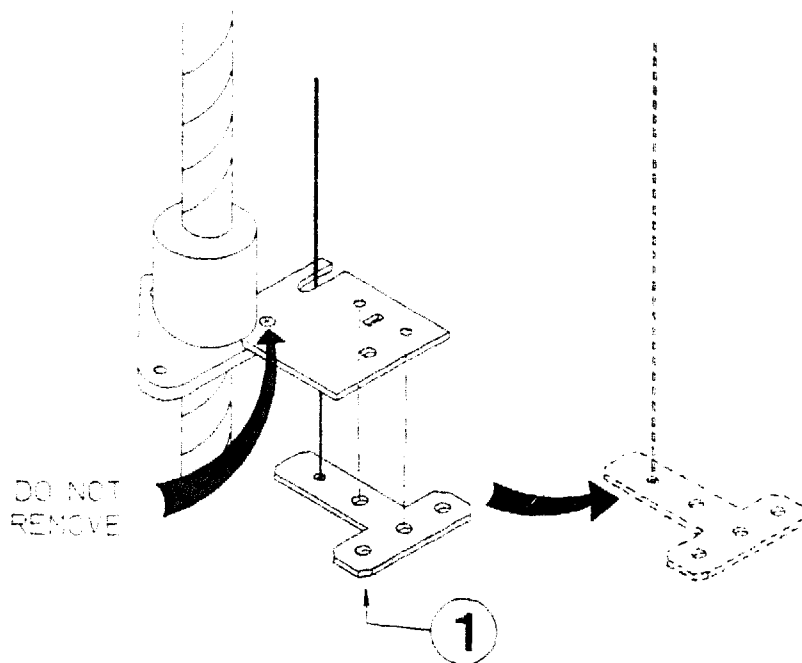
Removing the Vertical Tensioner Cable T-bar (Deskside Option)
